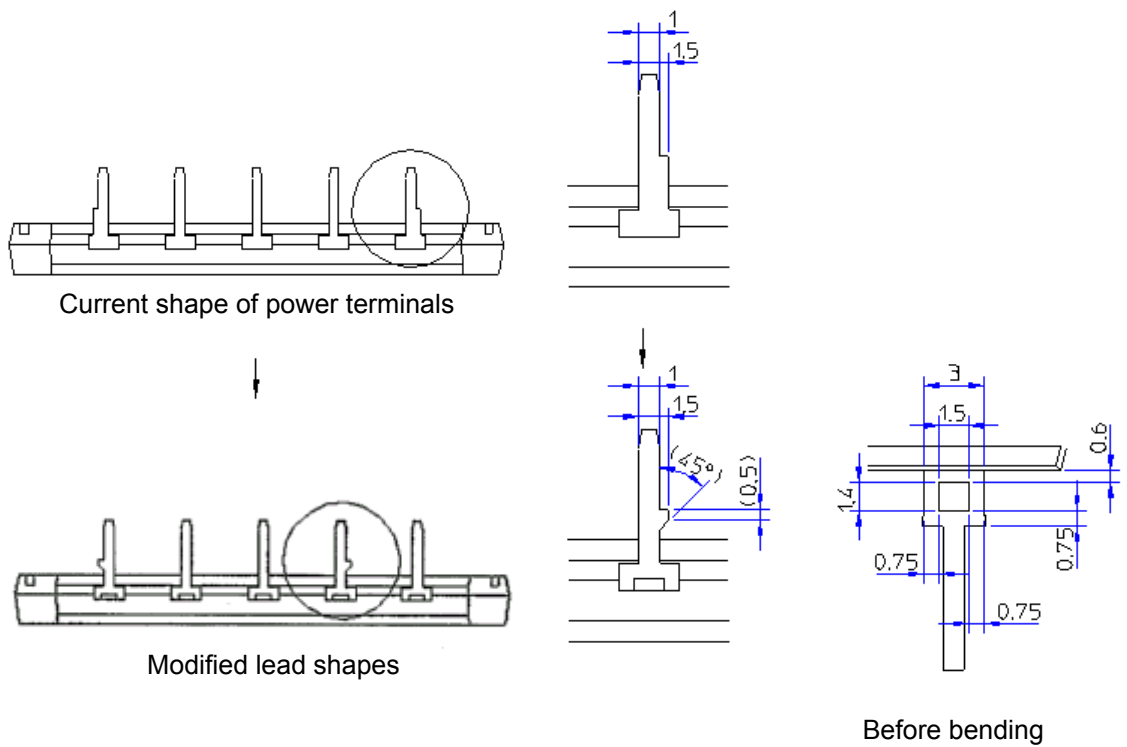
Terminal shape modification of Package A type mini DIP-IPM (power side)
